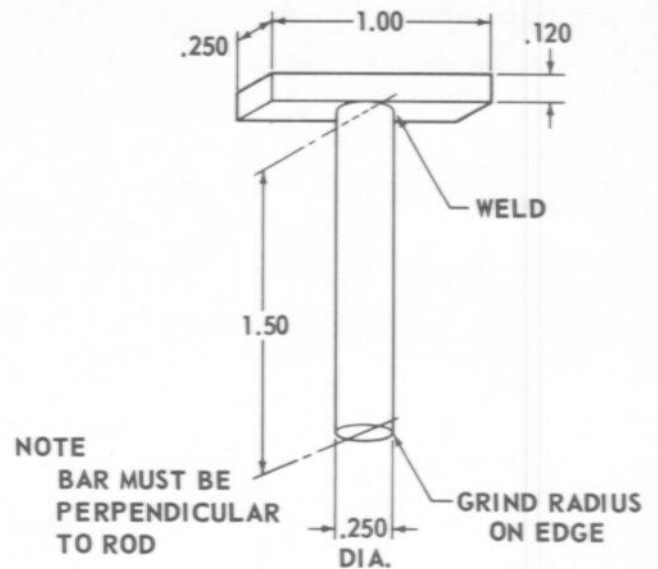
Fabrication of wrench and wood dowel; turbocharger assembly.
